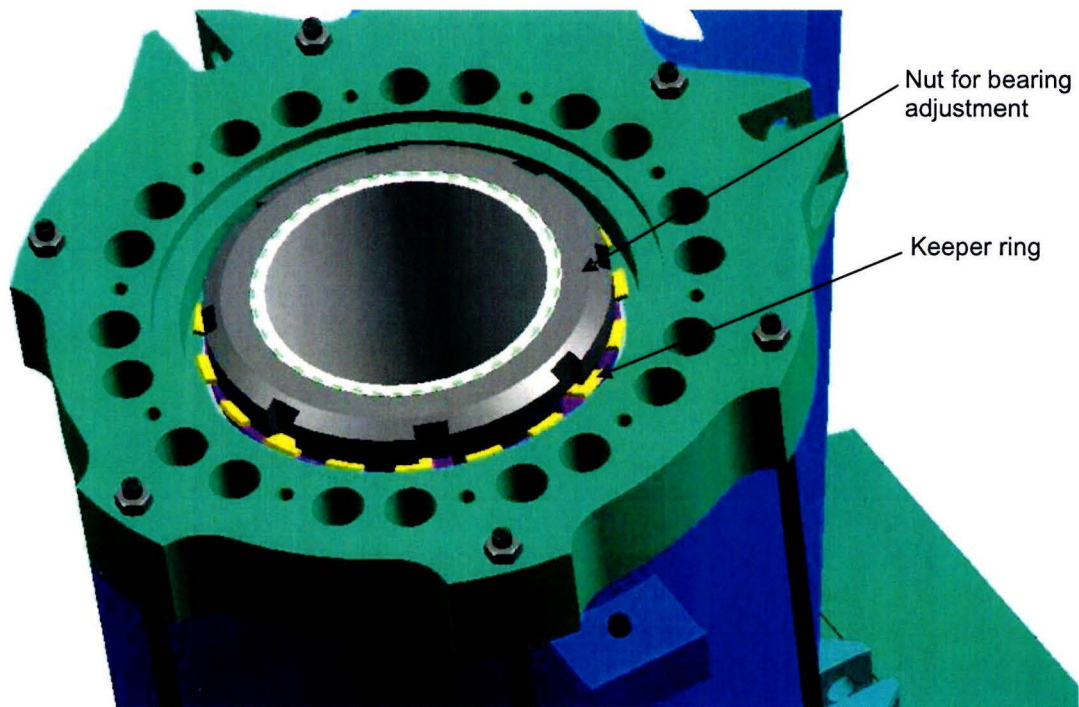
Bearing assembly secured with a nut with keeper ring
